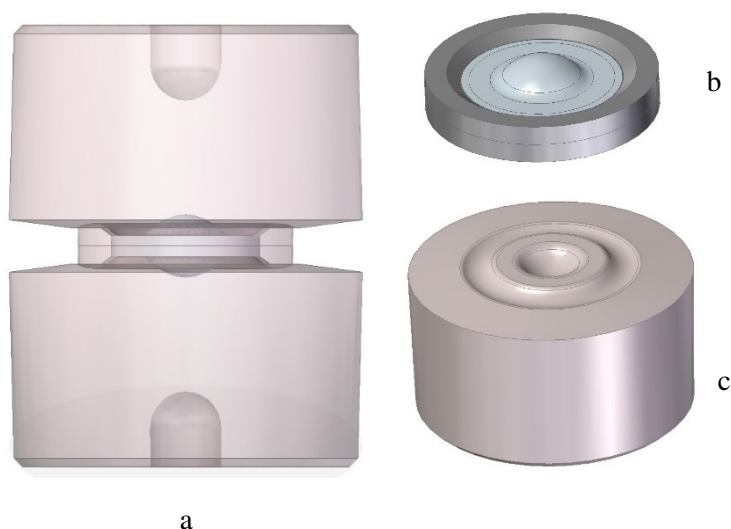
CAD representation of an assembled (a) and disassembled toroidal anvil cell. Encapsulating gaskets (b) and a single toroidal anvil (c) are included in the illustration.
